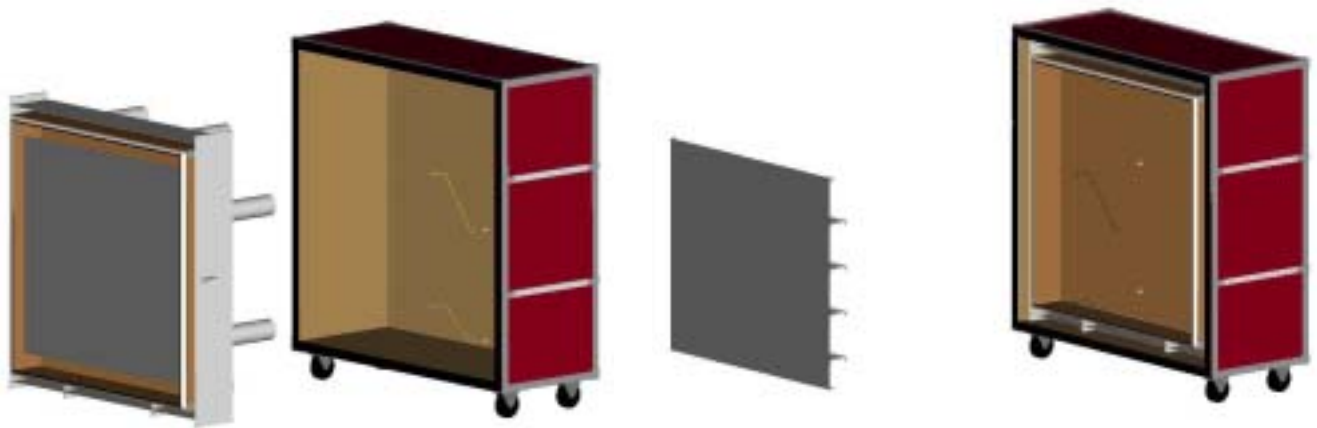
Exploded Views of the Hot Side of Universal Guarded Hot Box
